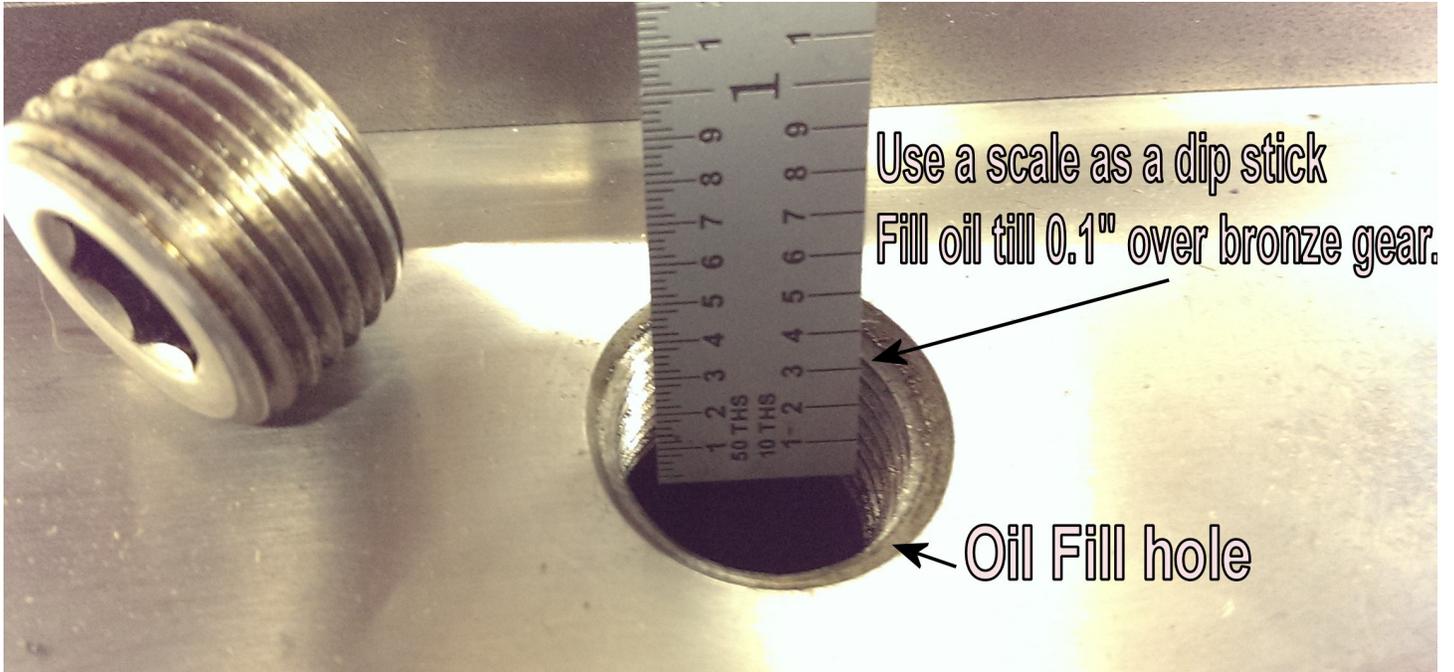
Oil fill, cover gear with 0.1 inch of oil.
